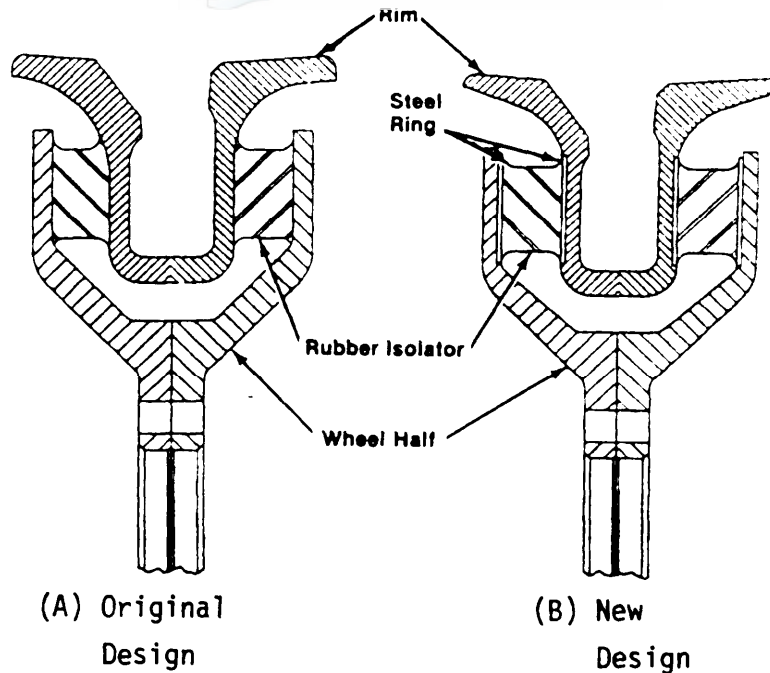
Isolator Design Modification for Prototype Quiet Idler Wheel
